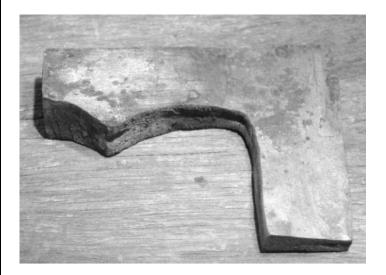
(left) The axe now has the high carbon steel welded along the blade, which, after the hammering involved in welding, is thinner, wider, and longer, but not yet brought to final thickness. When welding the blade should receive equal hammer blows on both sides to keep the steel centered.
